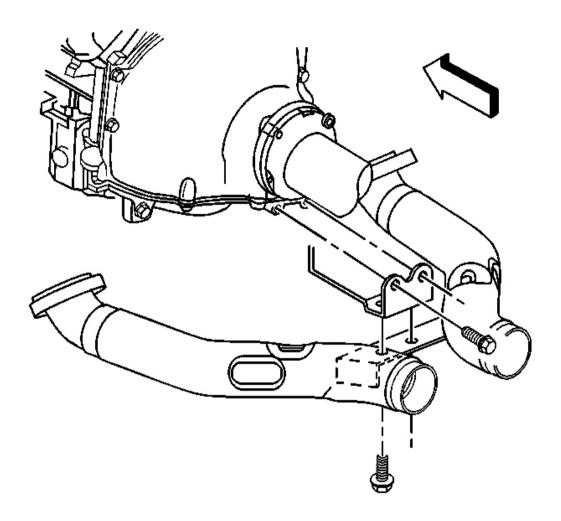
Exhaust Pipe Brace Lower & Bolts Courtesy of GENERAL MOTORS CORP.
